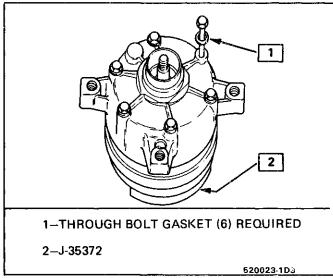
Front Head Installed: Thru Bolts and Gaskets In Place
